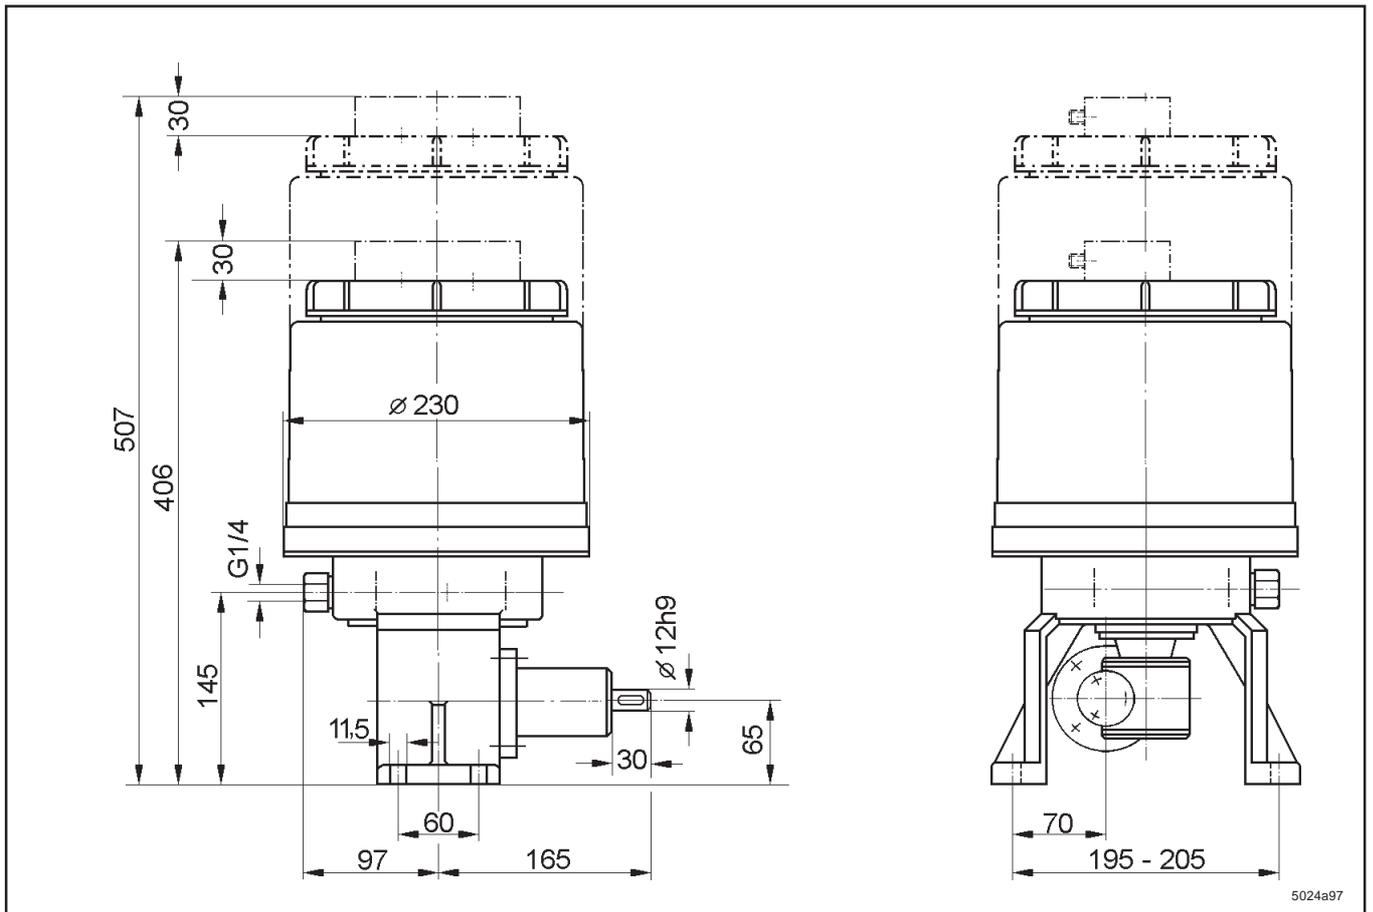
Dimensioned drawing of pump P 205, single-stage gear, 4/8 l plastic reservoir, free shaft end
